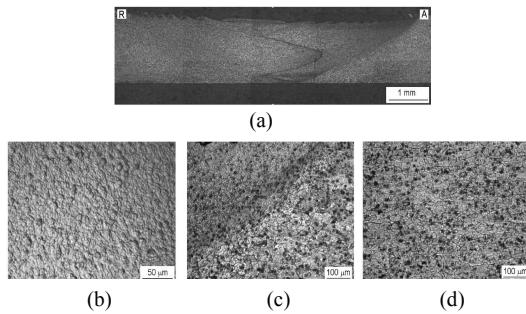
Macrograph and micrographs of weld obtained by fillet + cavity tool: (a) macrograph; (b) stirred zone; (c) TMAZ and HAZ; (d) parent metal. “R” means retreating side, “A” advancing side.
